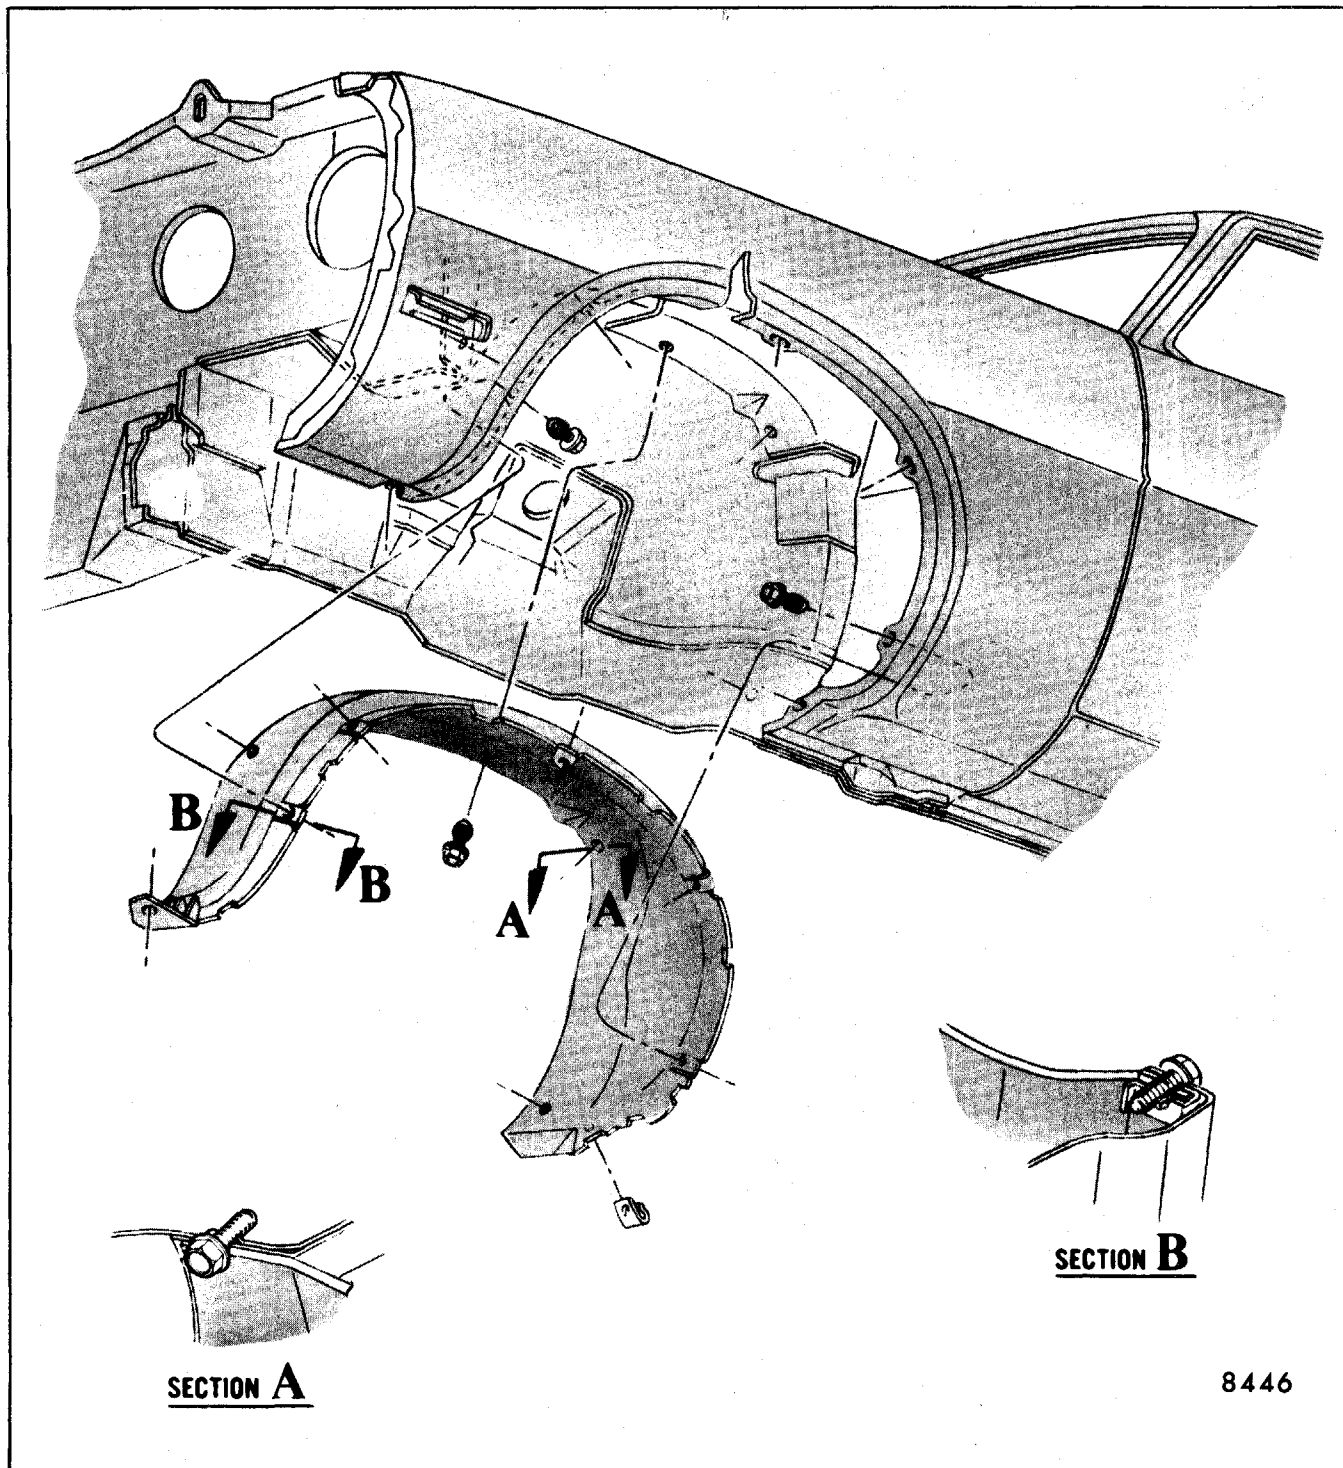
Front Wheelhouse Outer Panel Retention
